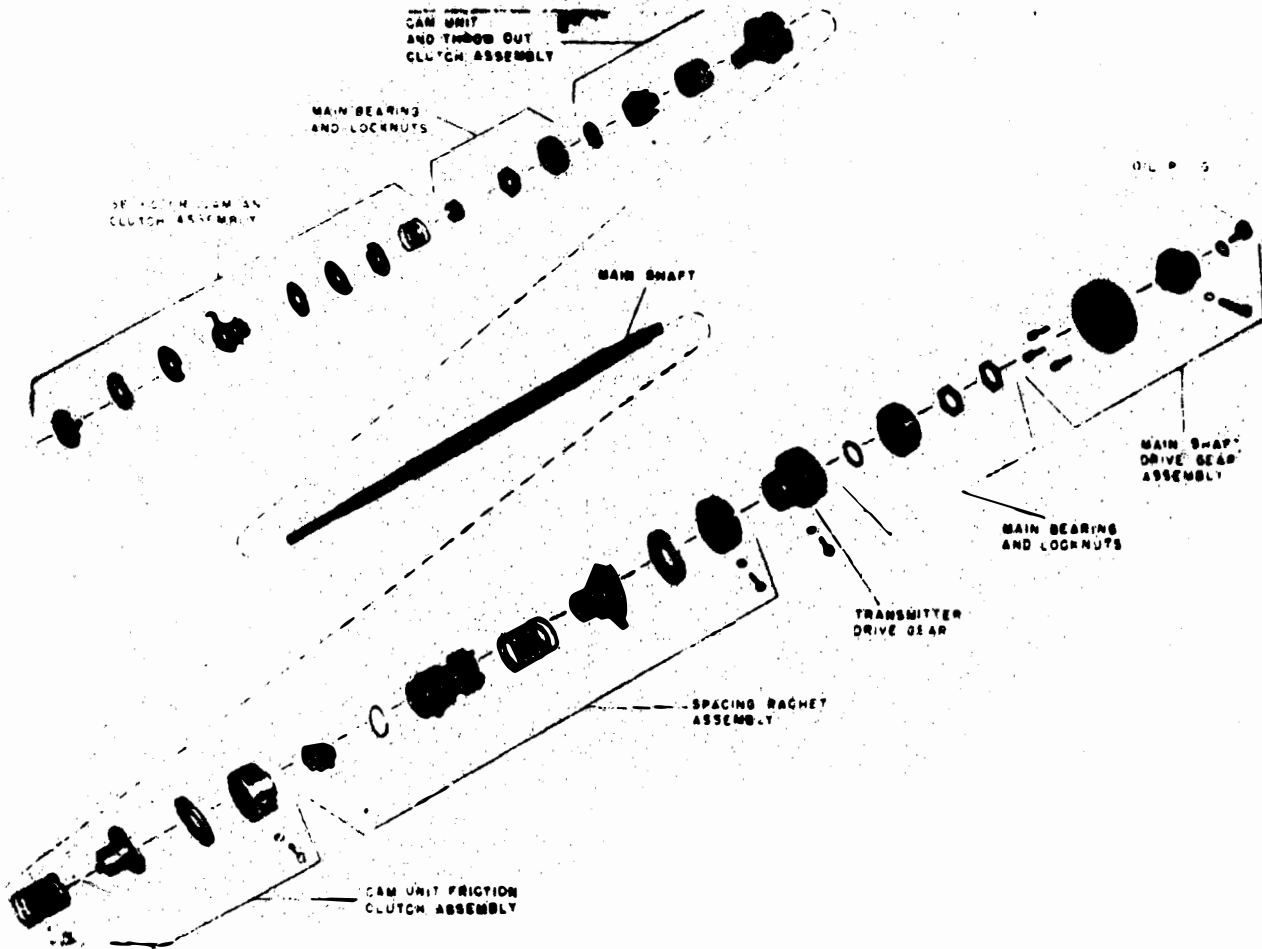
MAIN SHAFT PARTS IN SEQUENCE OF REMOVAL.
